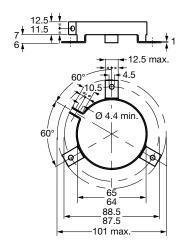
Dimensional outline of clamp for case \emptyset D = 65 mm
